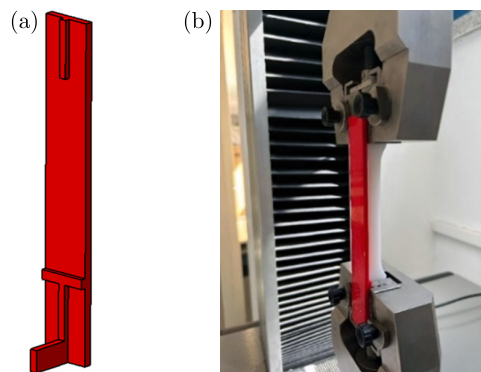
(a) Device for orienting specimens between trays; (b) test specimen attached to the test machine using the device.
